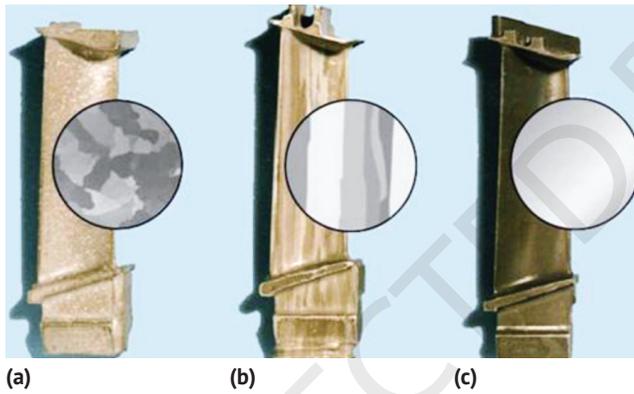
Microstructures in different casting nickel alloys: (a) equiaxial cast; (b) directionally solidified cast; and (c) single crystal [2]/Journal of Mechanical Engineering.
